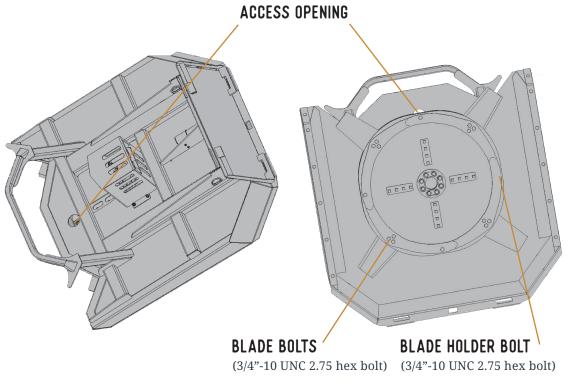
A BLADE HOLDER ACCESS OPENING & BOLT DIAGRAM
